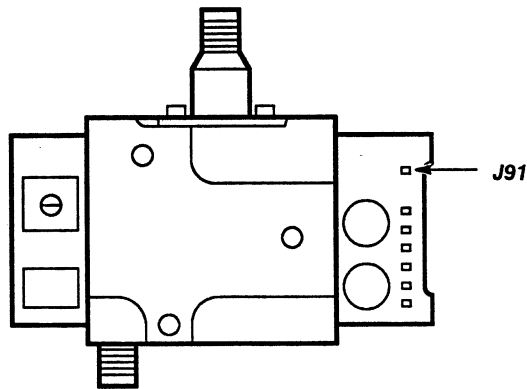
Removing and Replacing the A6 Calibrator Assembly
